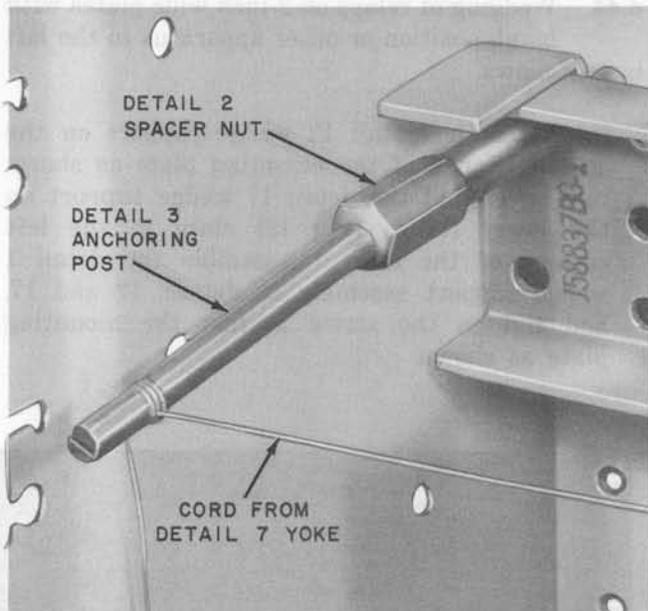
Detail 3 Anchoring Post Inserted in Left Detail 2 Spacer Nut
